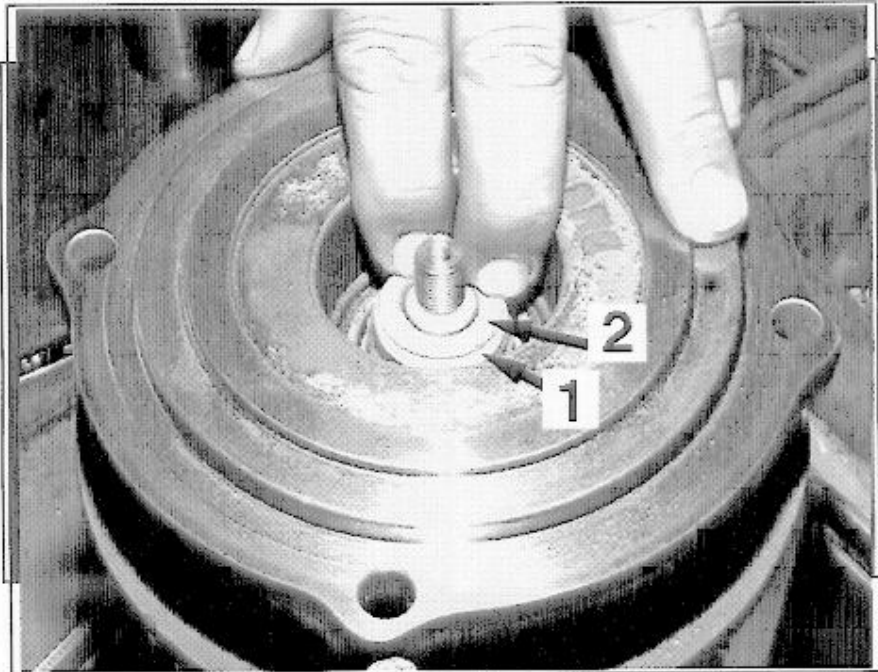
shows the ceramic rotary seal. Item 1 is the seal spacer. Item 2 is the rubber gasketed ceramic mating ring. Item 3 is a cardboard disc placed between the seal halves to protect the seal surfaces during shipment. Discard the cardboard disc before seal installation. Item 4 is the purebide E siliconized graphite seal ring.
